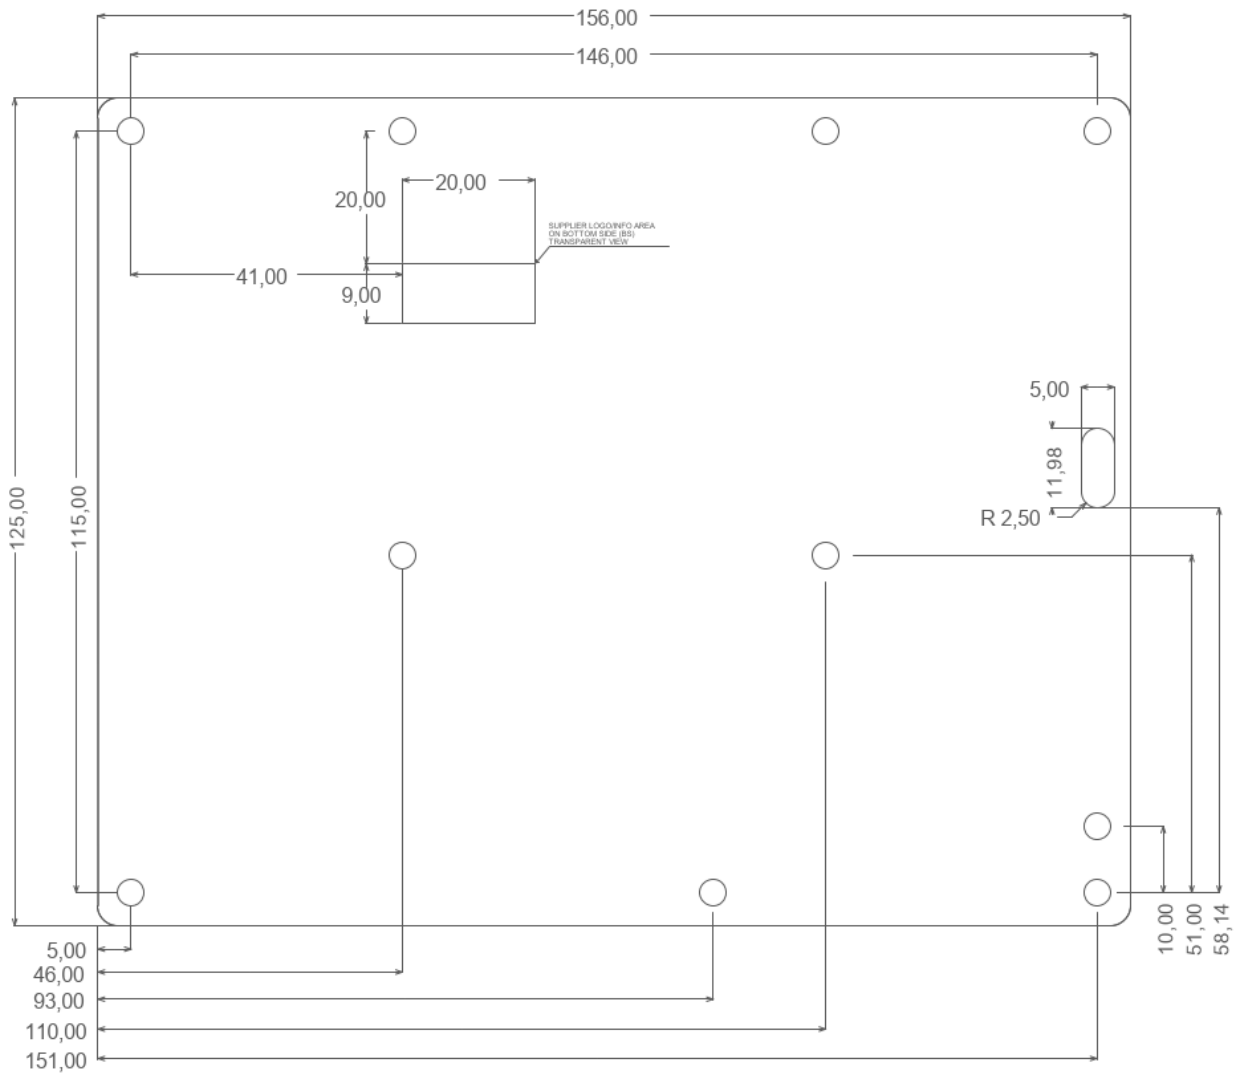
Board Mechanical Drawing (dimensions are in millimeters)
